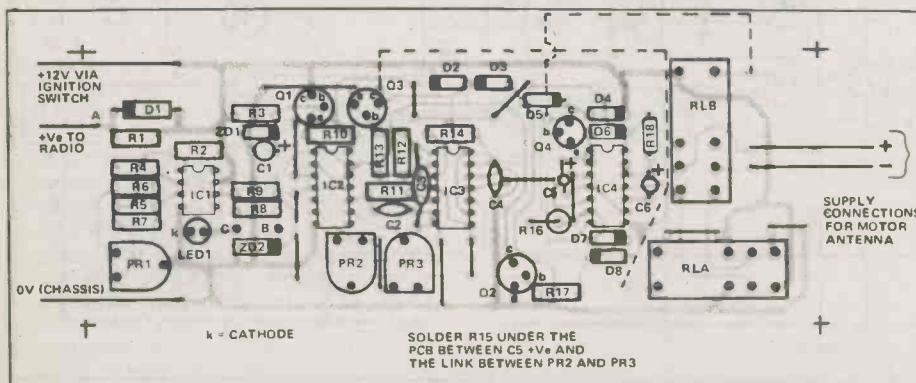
Component overlay. Note that R15 is soldered beneath the PCB.
